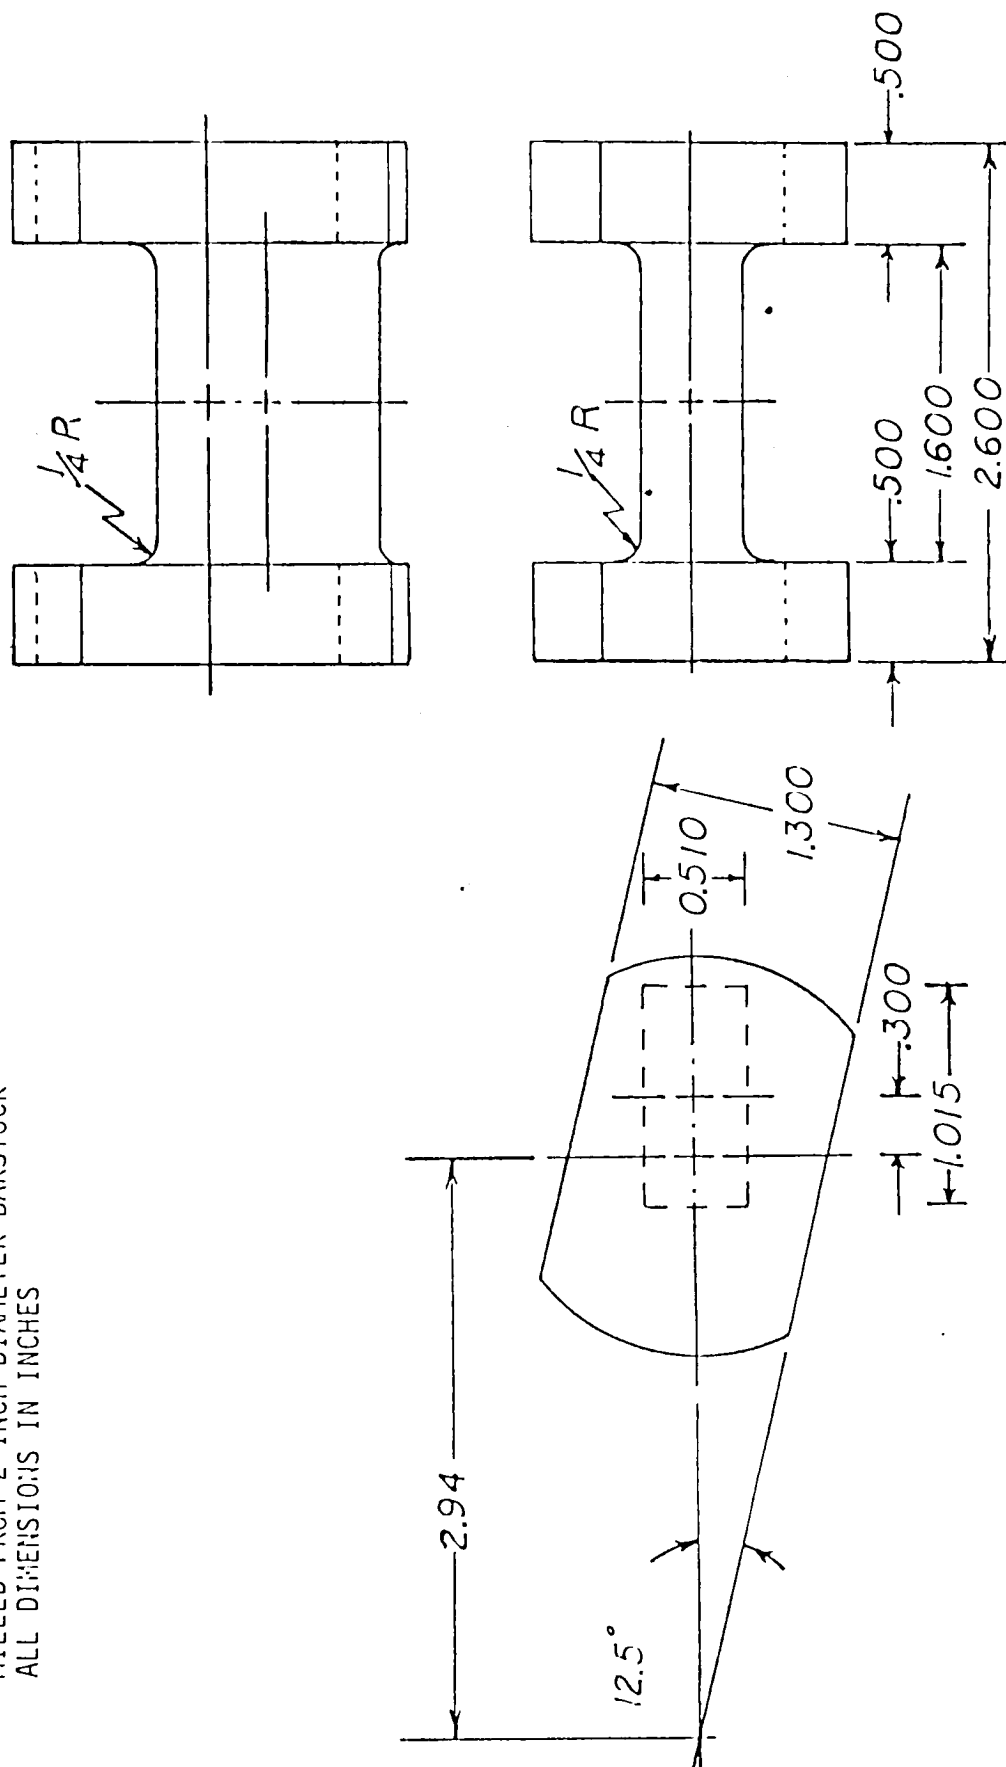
BLADE TYPE "A" FLEXURE LINK
